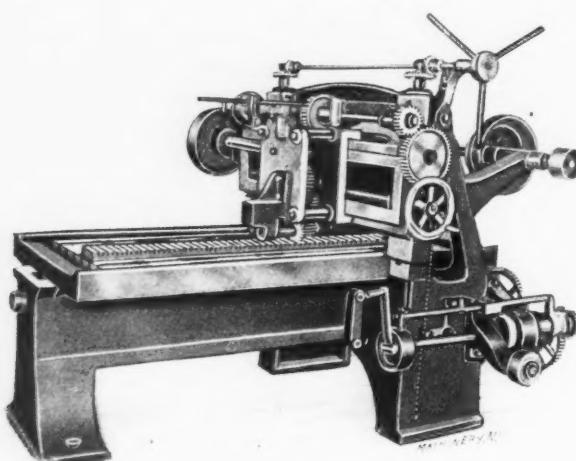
Planer Type Automatic Rack-cutter, built by G. Wilkinson & Son.
